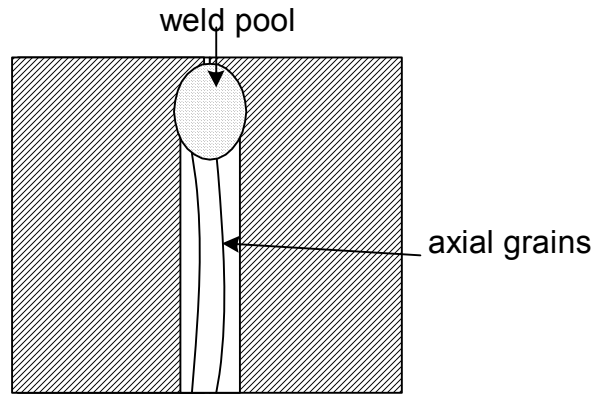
Schematic of axial grain in weld joints
